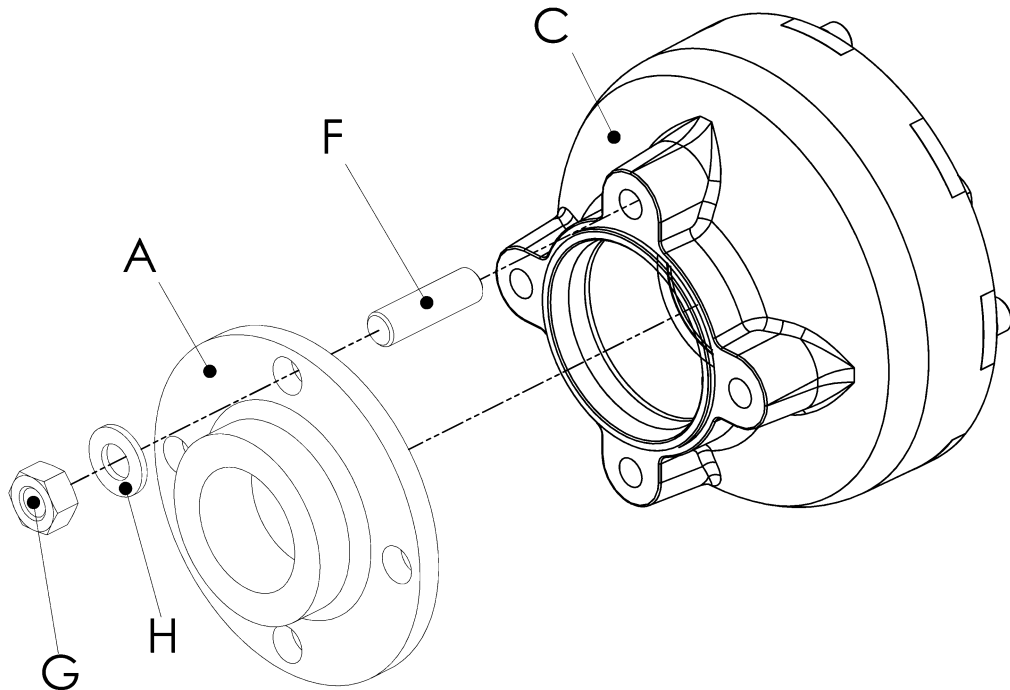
Screwing the coupling to the transmission flange using stud screws
